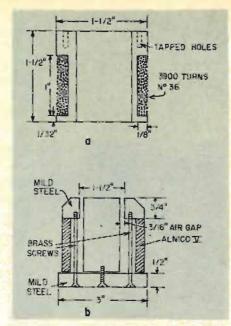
a—How the sensing coil is made. b—Cross-section of sensing-magnet unit.
